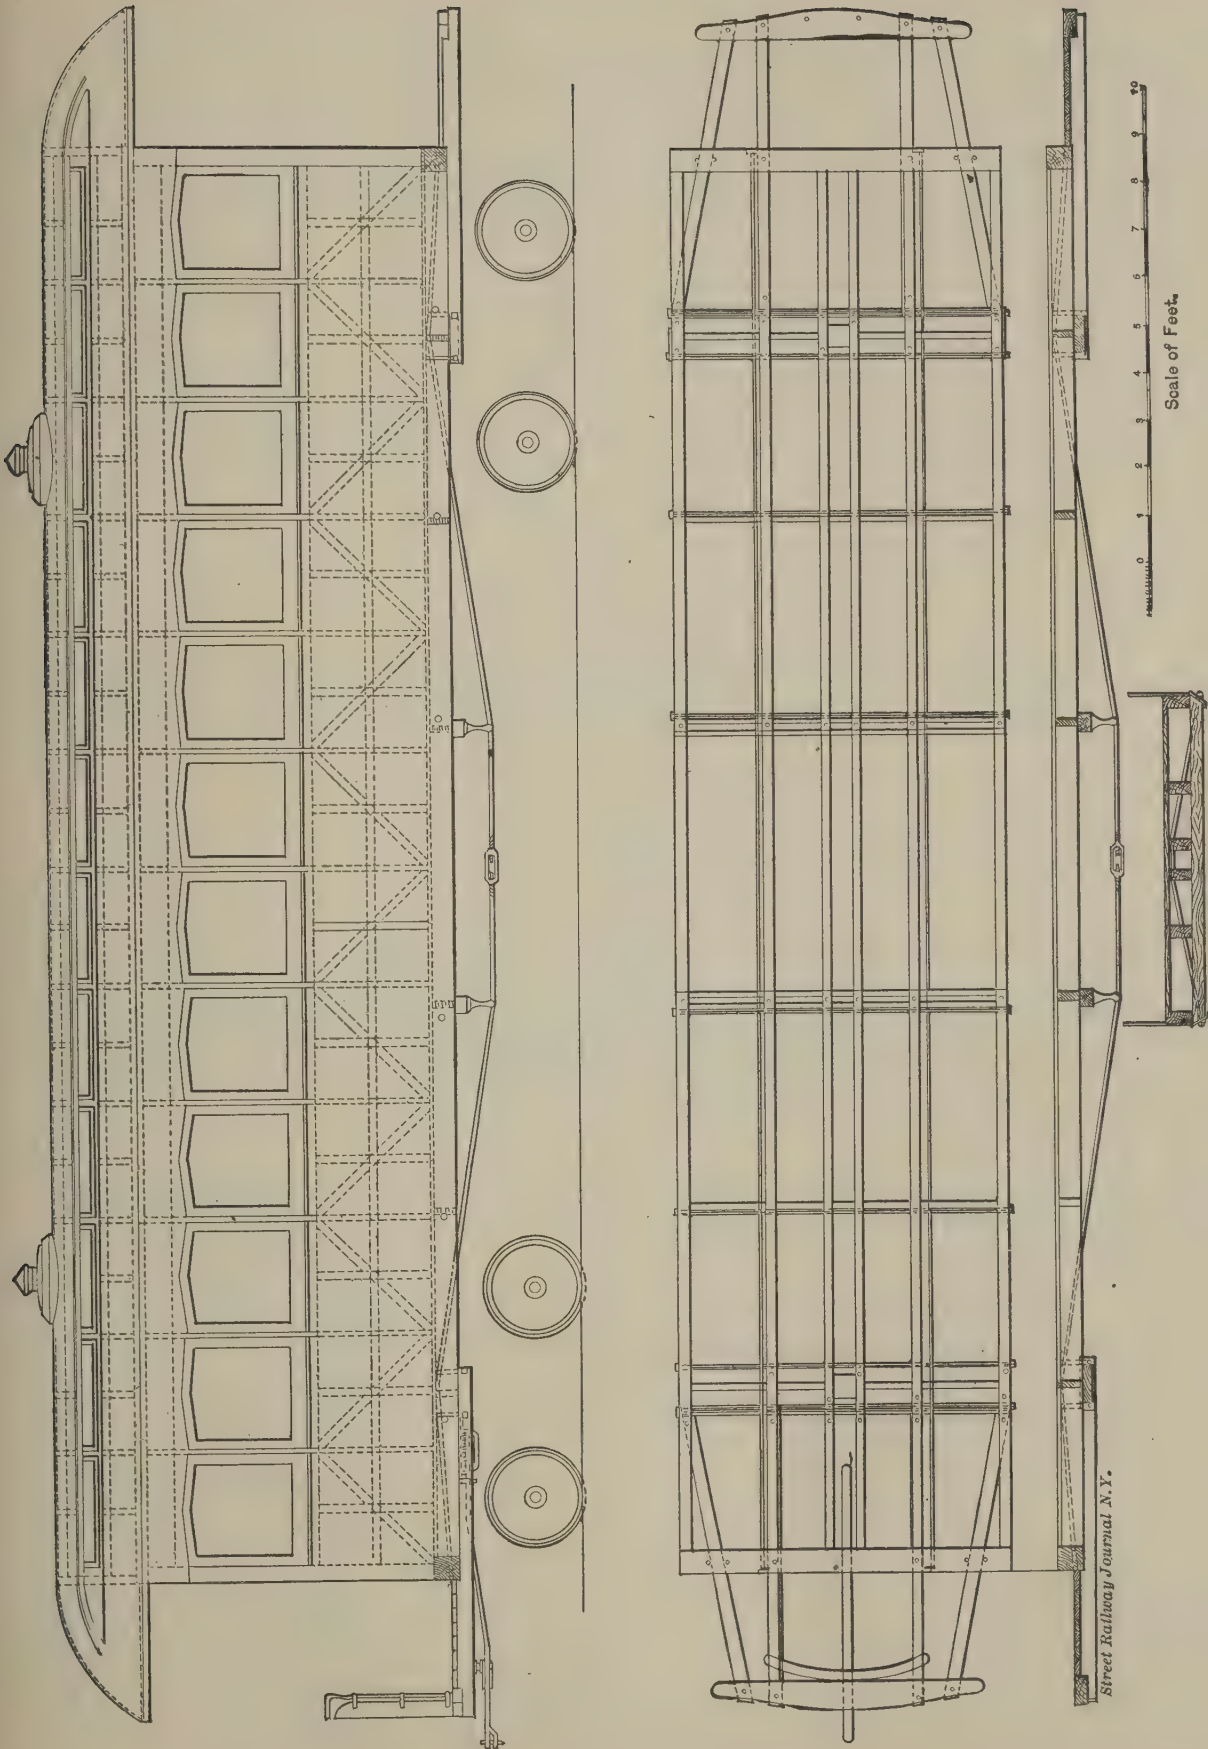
EIGHT WHEEL CLOSED CAR—LEWIS & FOWLER MANUFACTURING CO.
